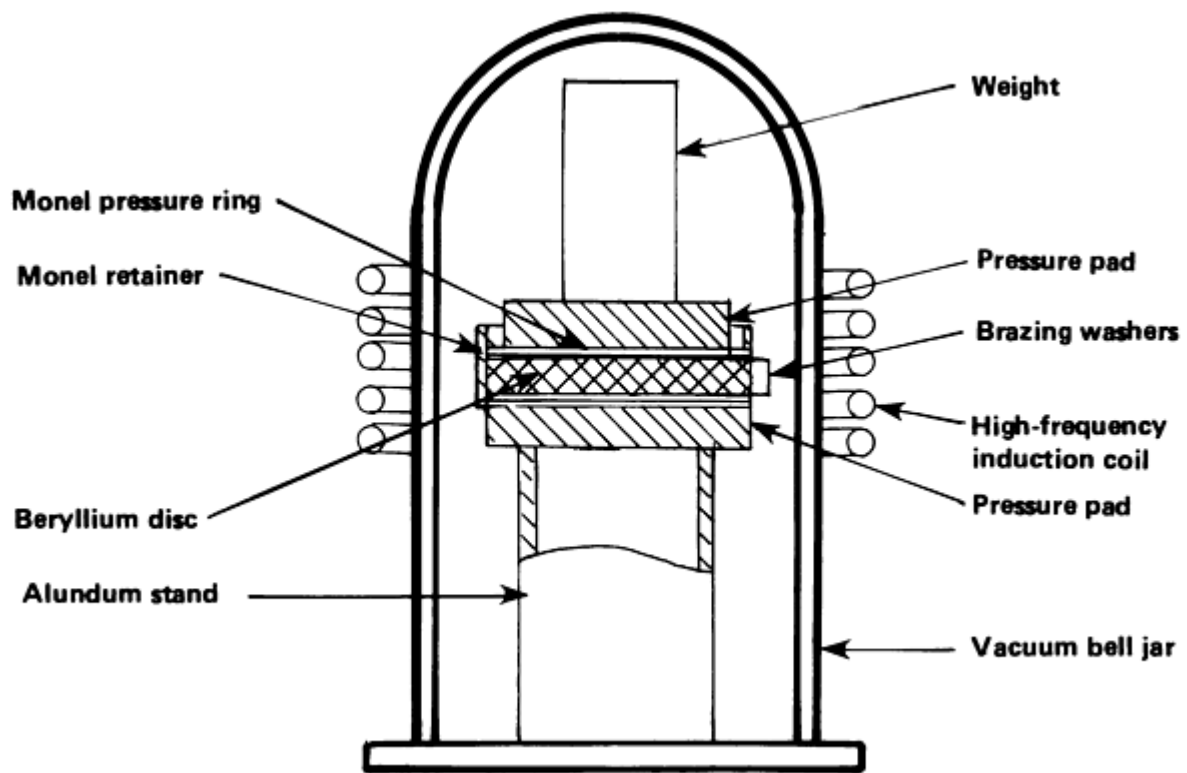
INDUCTION HEATING APPARATUS USED TO VACUUM BRAZE BERYLLIUM AND MONEL COMPONENTS
